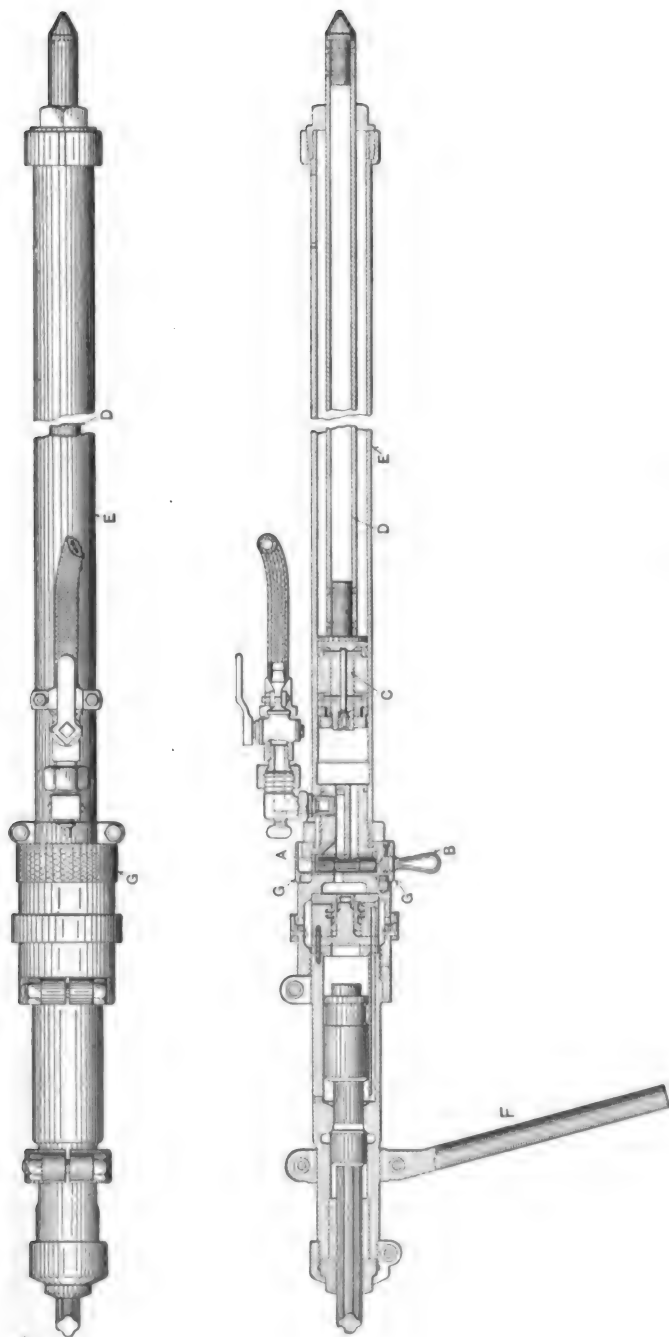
Sullivan Air-Feed Hammer Drill.
